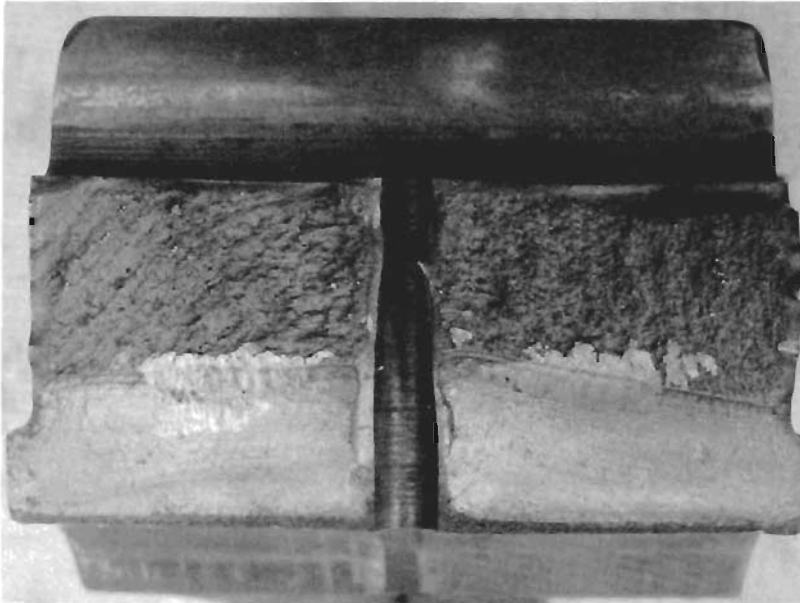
Spur idler gear, 1 \times . Fatigue crack origin in the bore at each of the six oil holes.
